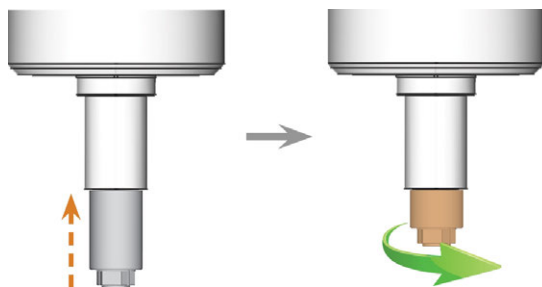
SCREWING IN THE COLLET CHUCK (MARKED ORANGE IN THE RIGHT ILLUSTRATION) INTO THE SPINDLE WITH YOUR HAND
